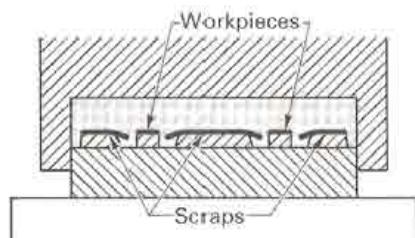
Method of blanking sheet metal using the Guerin process.
